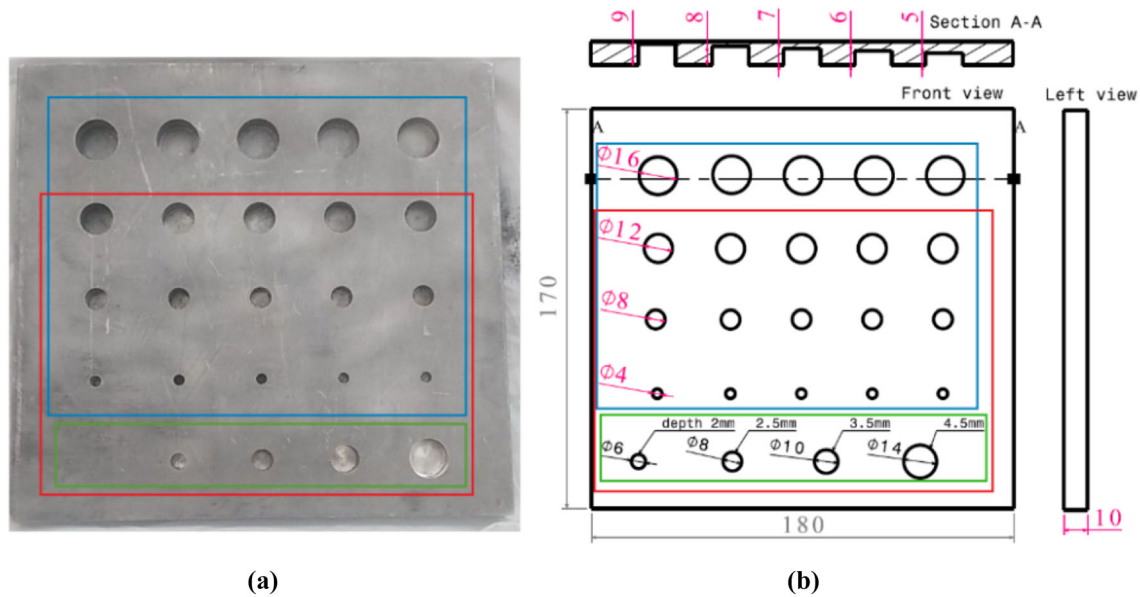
(a) Aluminium specimen with different flat bottom holes, with aspect ratios D/d from 1 to 20, and (b) the relative technical drawing with dimensions, depths and relative positions; blue window-part of the sample used for the calibration procedure, red window-part of the sample used for the demonstration remarking in green the defects created exclusively for this purpose (Color figure online)
